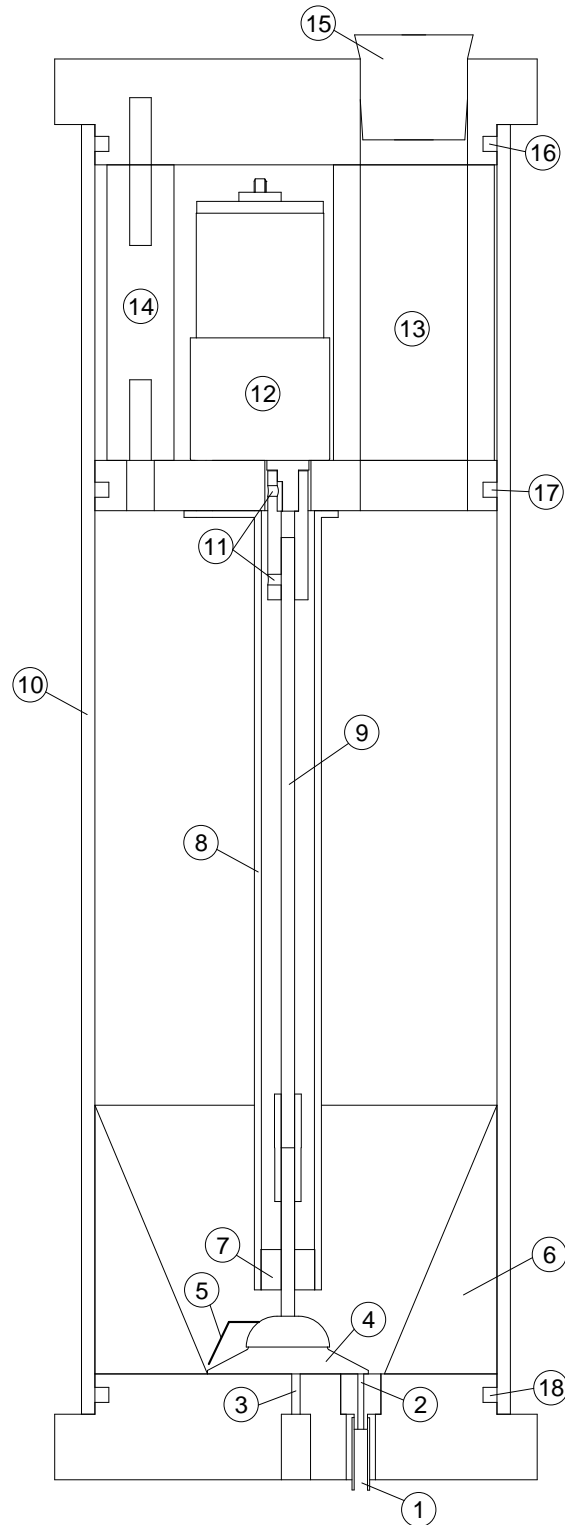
Cross sectional view of the rotary brush feeder. (1) Gas and particles outlet; (2) Outlet orifice; (3) Carrier gas inlet; (4) Goat hair brush; (5) Wiper; (6) Aluminum conical insert; (7) Brass bearing; (8) Protective housing for driveshaft; (9) Driveshaft; (10) Acrylic housing; (11) Set screws; (12) Drive motor; (13) Particle loading port; (14) Support for motor mount (1 of 3); (15) Particle loading port stopper; (16), (17), (18) O-ring seals.
